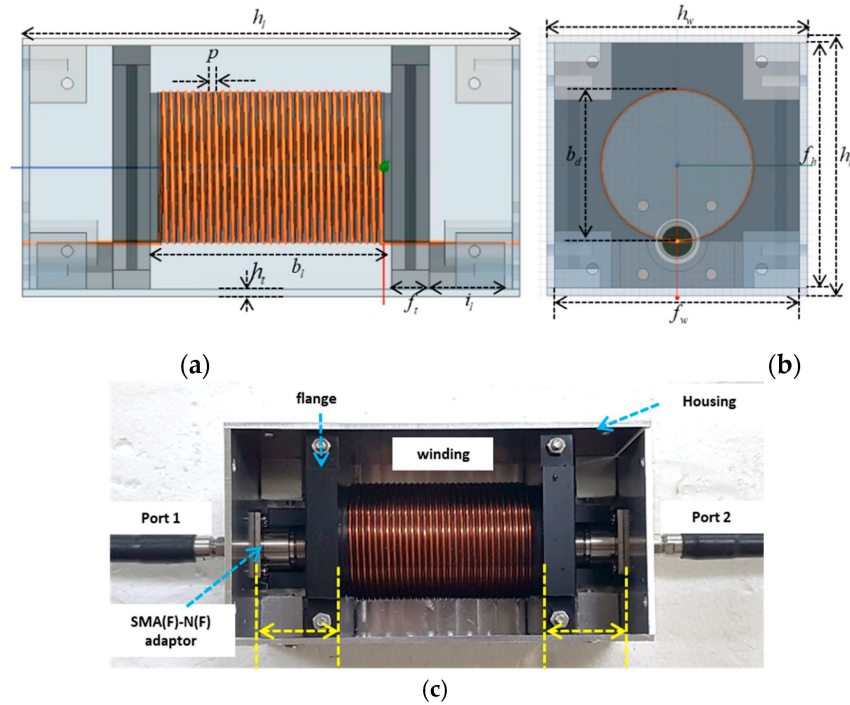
Structure of prototype 30-turn single-layered solenoid. (a) Drawing in front view; (b) Drawing in port side view; (c) A picture from above with radio frequency (RF) cables connected and with upper housing removed.
